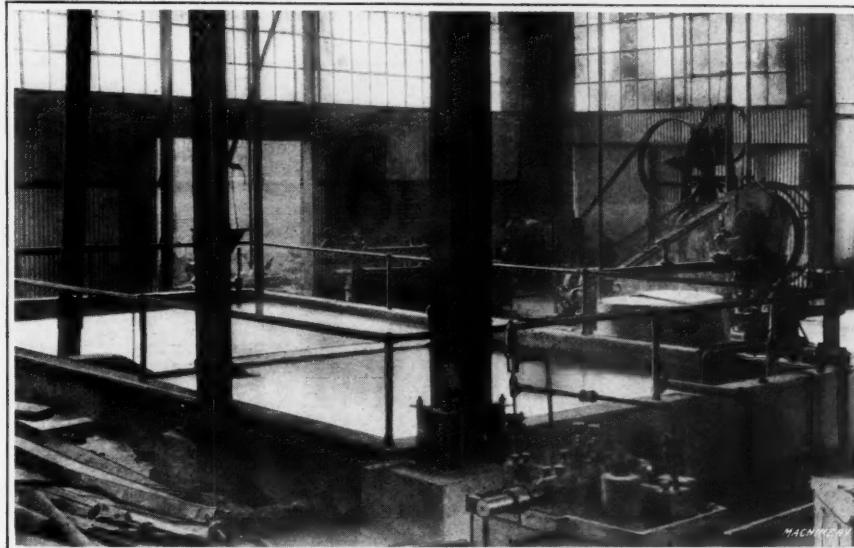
Cooling Tank for Quenching Oil used in hardening Shells—Oil passes through Pipe Coils in Water Tank
